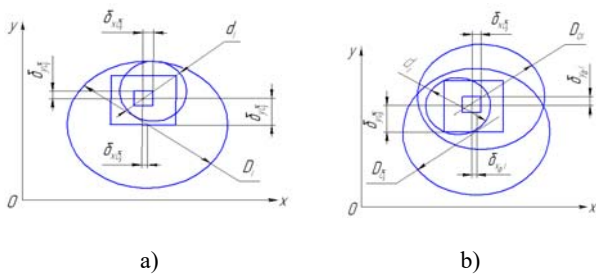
Mutual location of the bolts and holes of the i -th coupling with a gap: a) A-type coupling; b) B-type coupling
